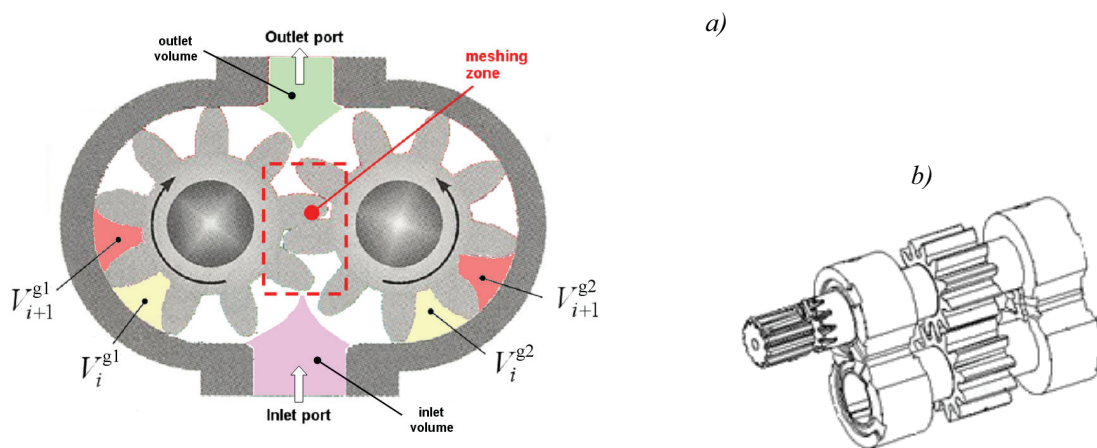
a) Operation of a gear machine; definition of the control volumes for the HYGESim model
